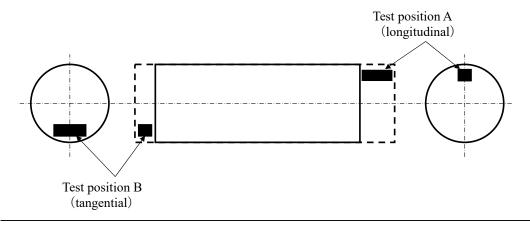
Alternative Directions or Positions for the Test Specimens for Flanged Shafts
